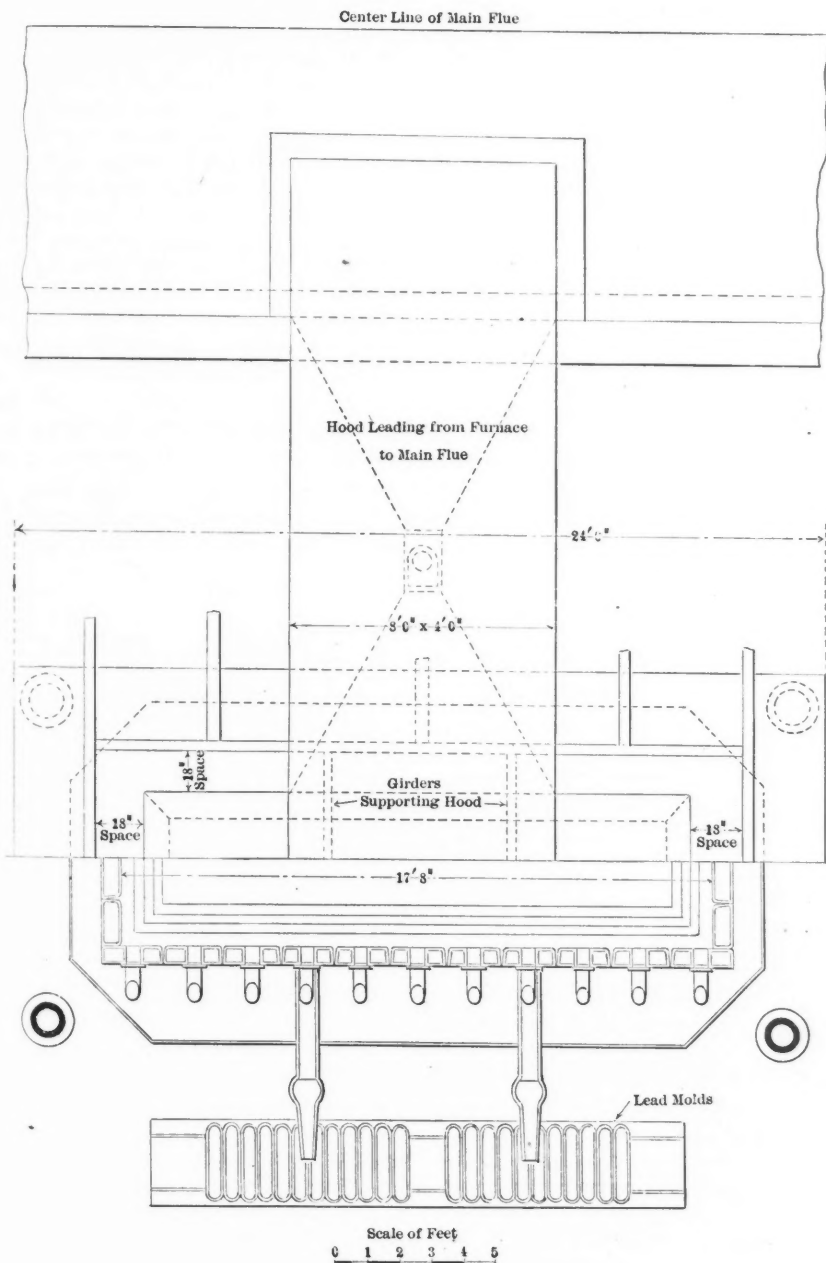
PLAN OF 120-TON SMELTING FURNACE, SHOWING HALF SECTION THROUGH WATER-JACKETS
